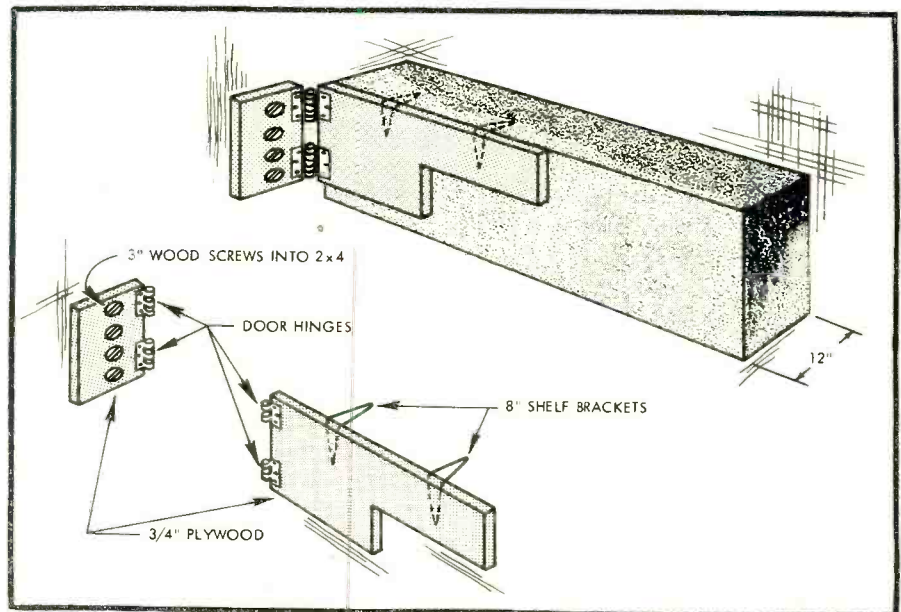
Drawing showing how the right cabinet is mounted. The hinge for the left cabinet is mounted in a similar manner on the left end of the cabinet.
